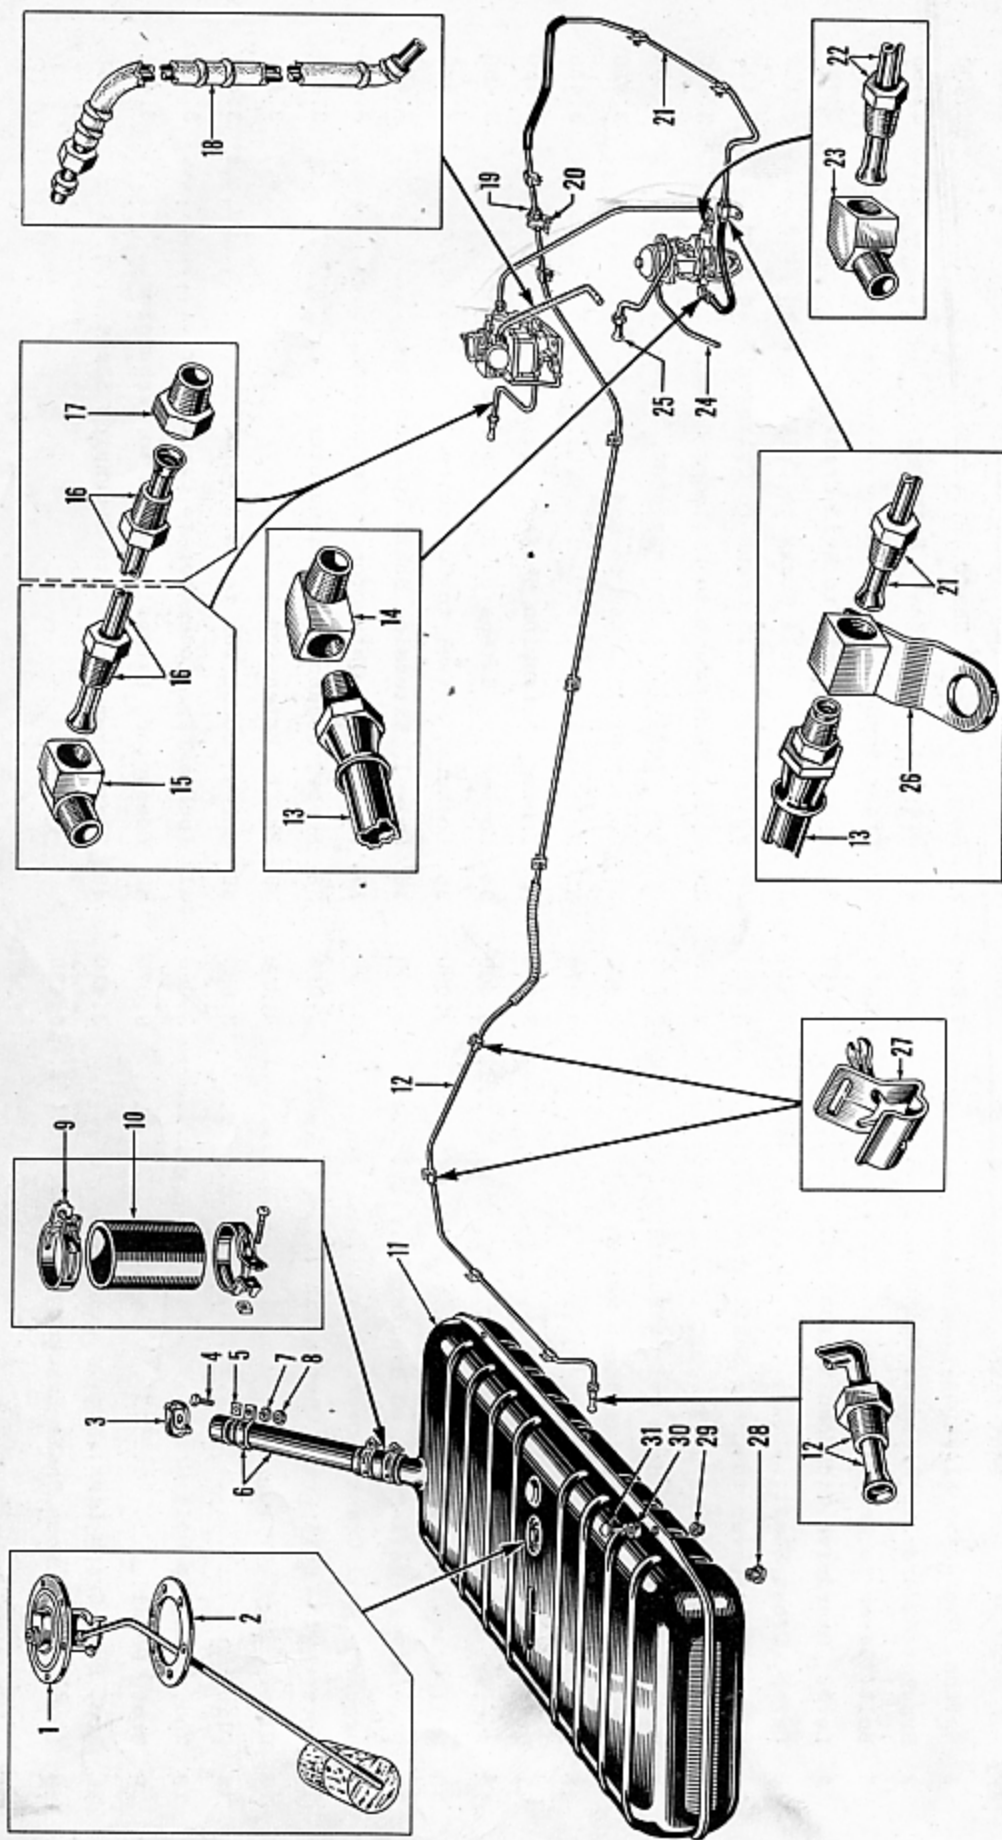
CHASSIS FUEL AND VACUUM LINES - INSTALLED VIEW
